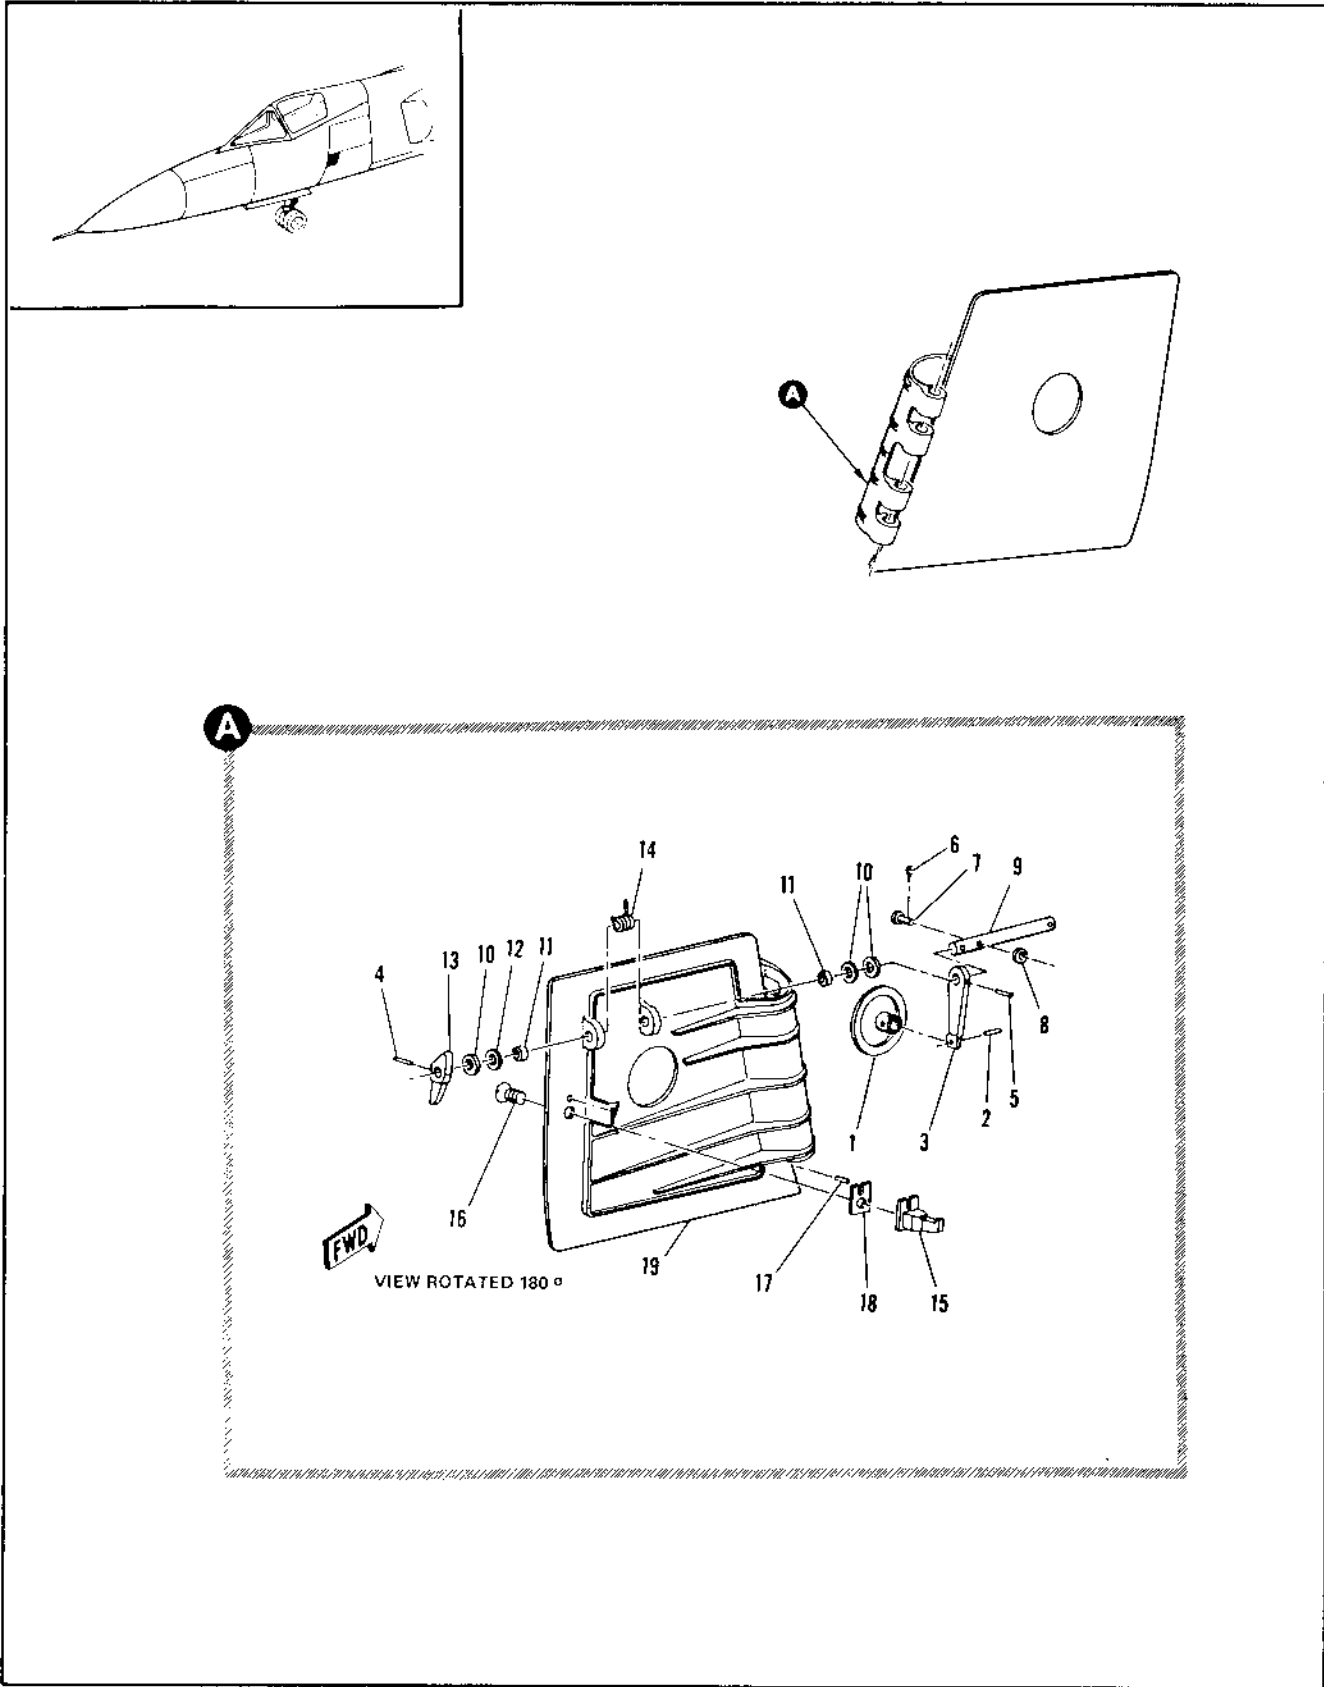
External Power Access Door Assembly Sta 171 to 175
